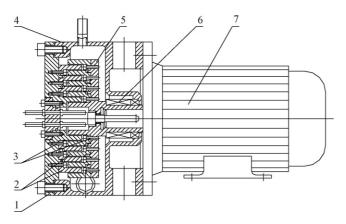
Schematic description of RSR. (1) Cover cap; (2) rings; (3) bolts; (4) casing; (5) rotor-seat; (6) seal; (7) motor.
